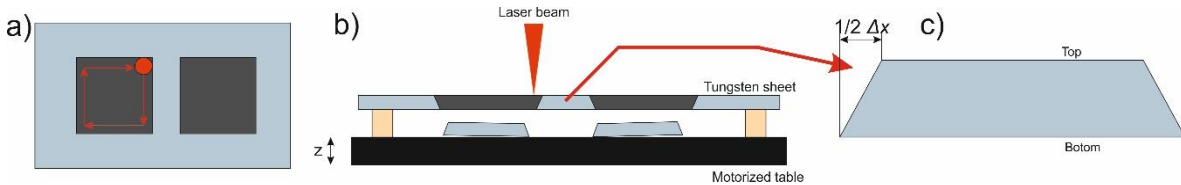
Cutting of square holes in tungsten sheet. a) top view; b) side view; c) maximized view of the spacing between two adjacent holes, Δx – the difference between spacing of adjacent holes in the upper and lower parts of the specimen.
